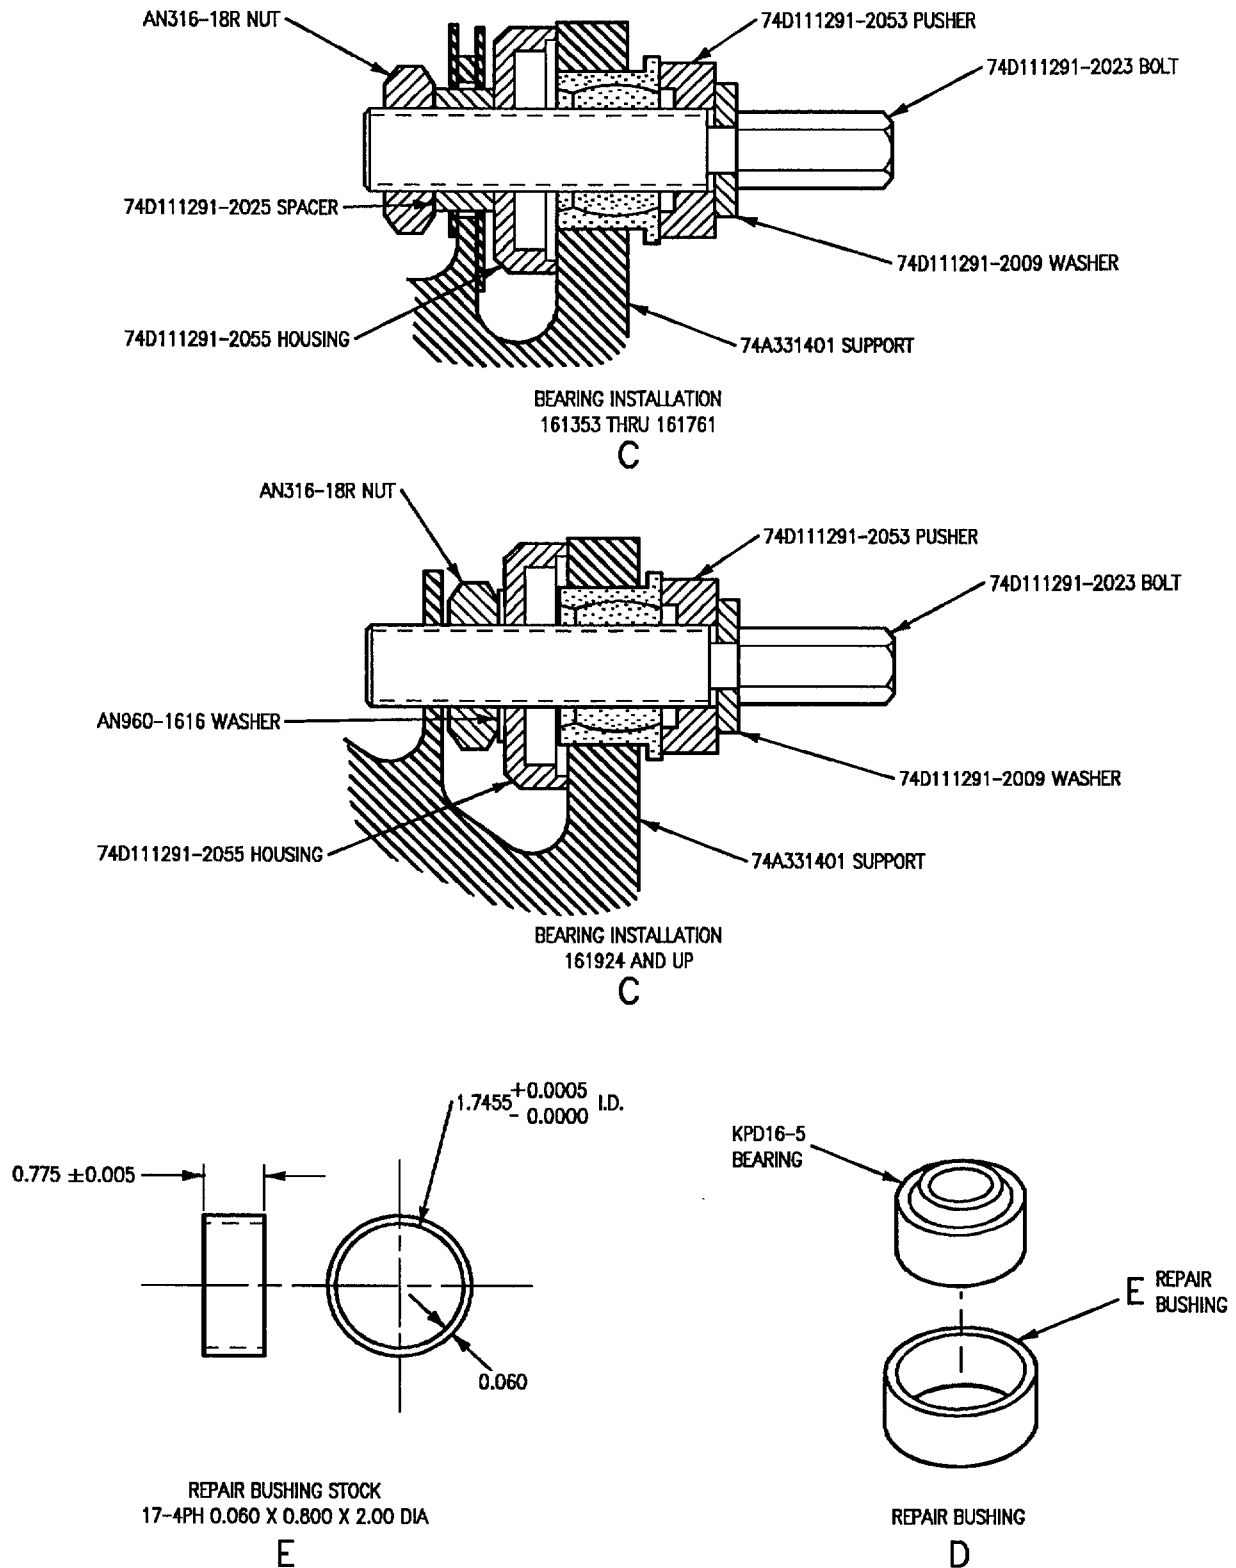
Support 74A331401, Bearing KDP16 Repair (Sheet 3)
